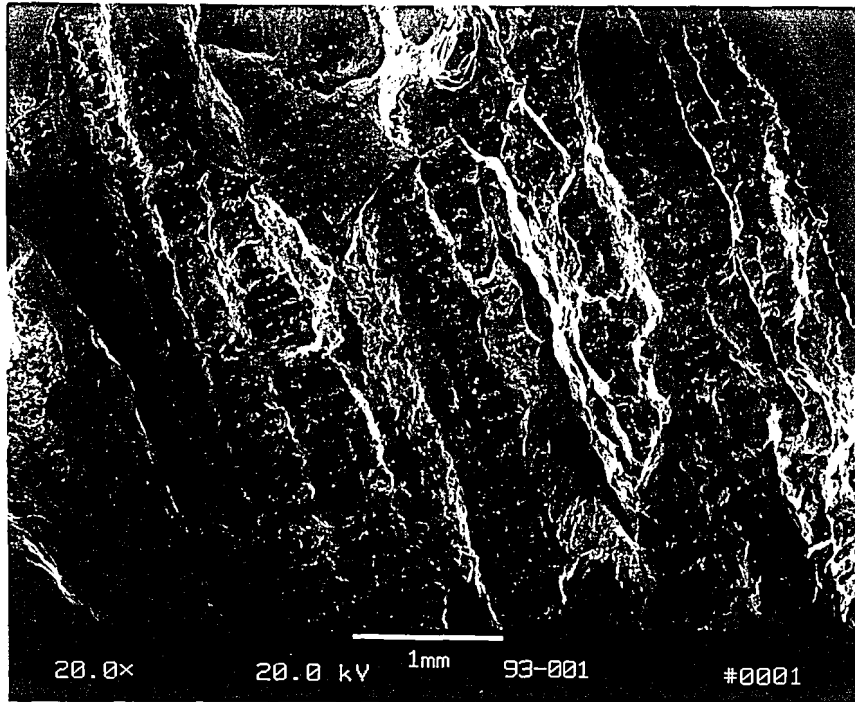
Heat #4 On-Cooling Gleeble Specimen (2050-2000F) Fracture Face Showing 0% Reduction of Area. Note Appearance of Primary and Secondary Dendrites on Fracture Face and Smooth Fracture Surface Characteristic of Cleavage Fracture Mechanism.
